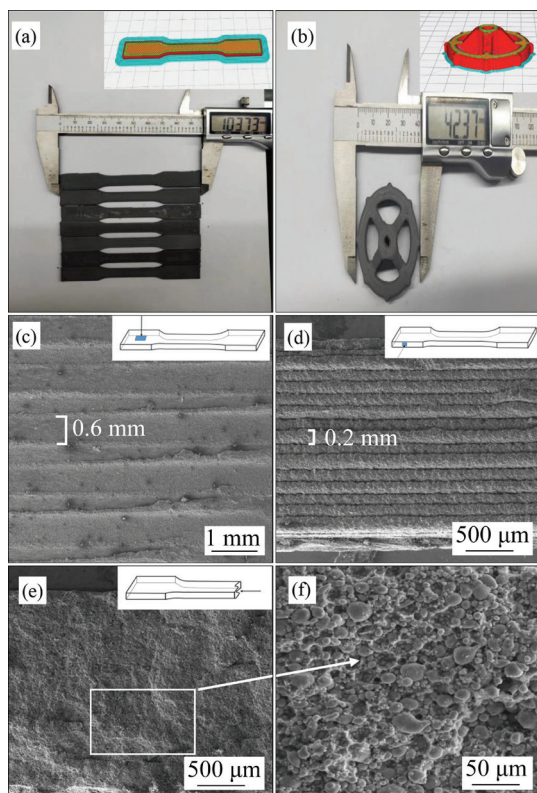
Photos of CAD modes and as-printed tensile sample (a) and rotating nut (b); surface (c), side (d) and fracture (e, f) images of printing tensile samples
